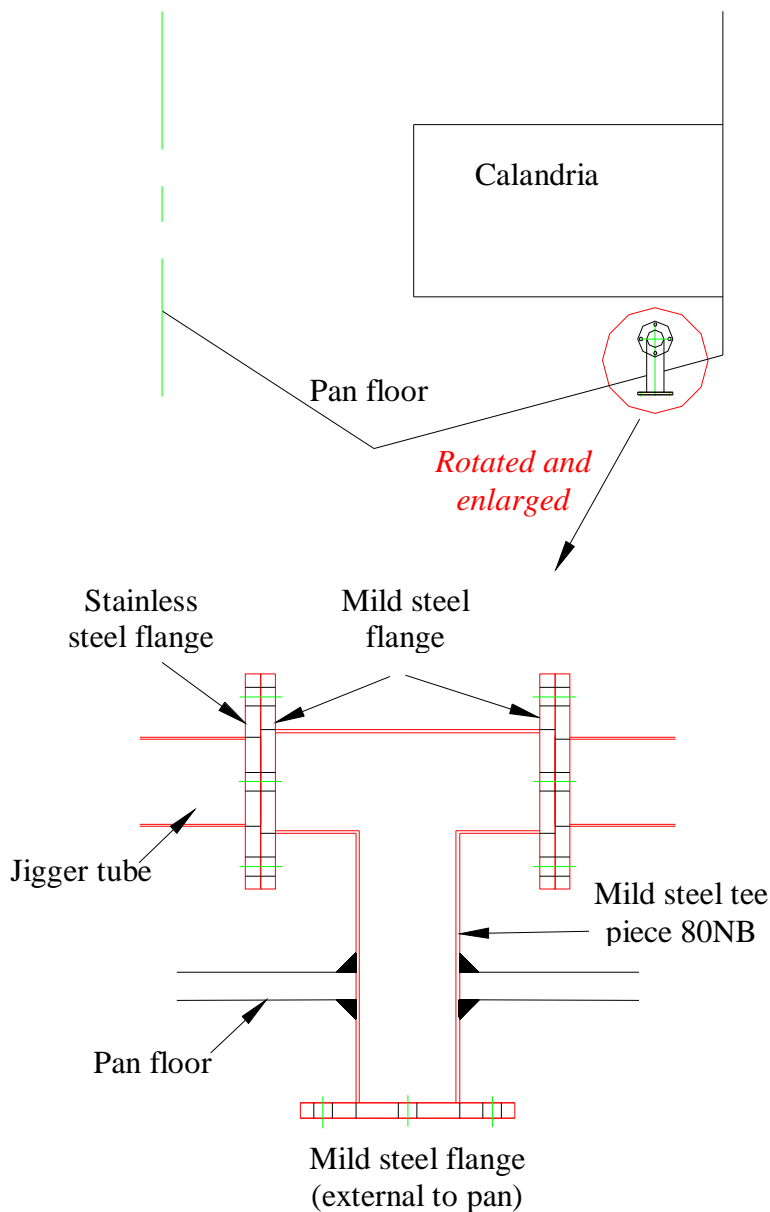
Details for installing the inlets of the SRI Jigger Tubes System.
